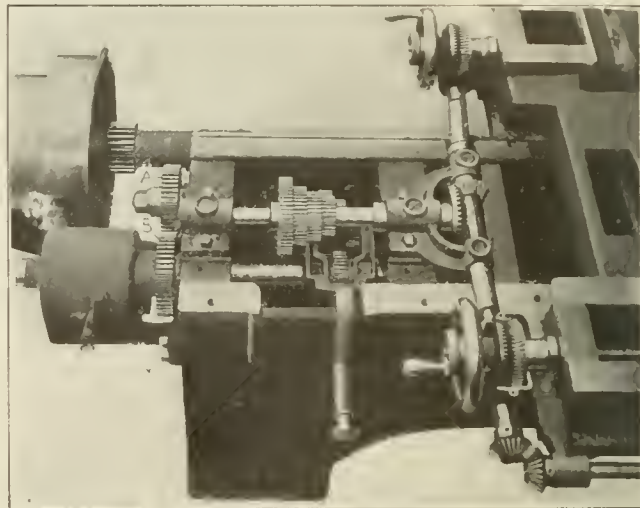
View of Pulley Lathe with Headstock removed to expose Feed Mechanism
